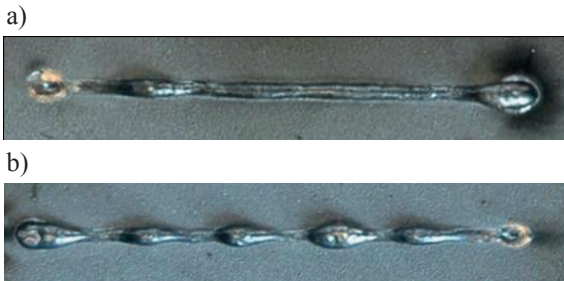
A view of the humped root of bead-on-plate welds, as a result of key hole instability, produced at 3300 W and welding speed: a) 1300 mm/min (152.8 J/mm), b) 1750 mm/min (113 J/mm)
